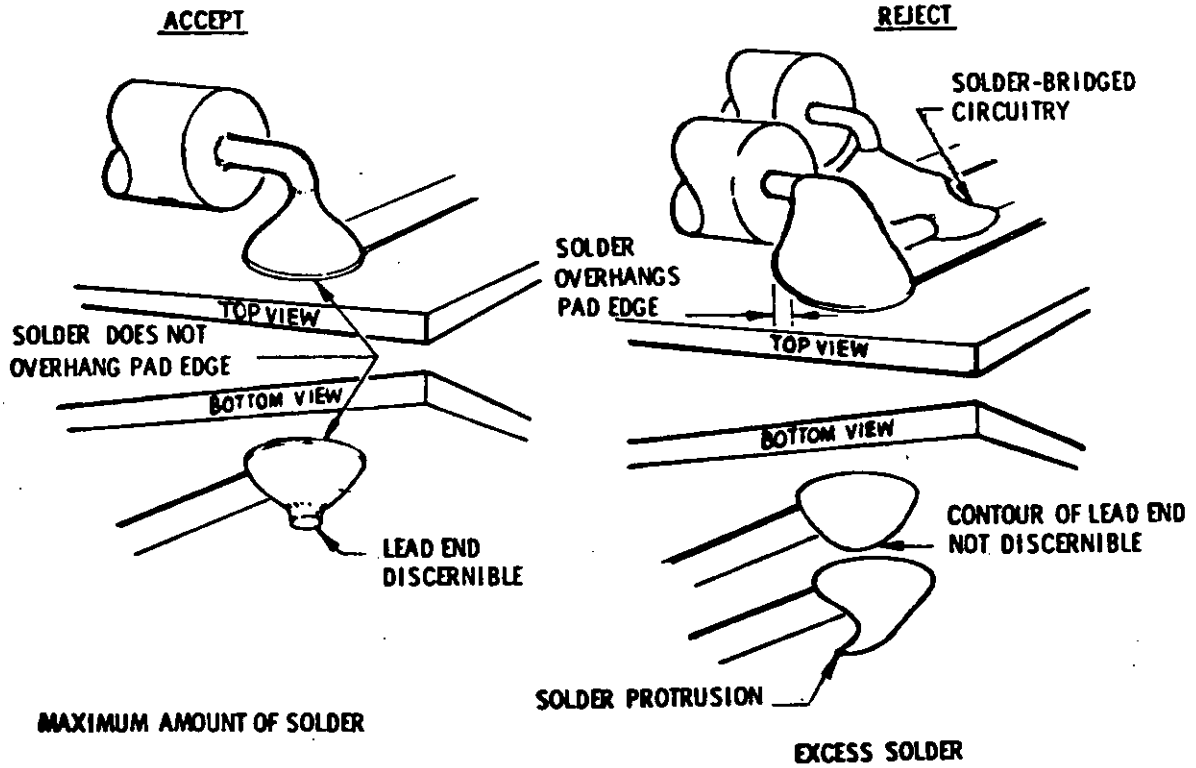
Plated-thru holes - amount of solder on joint.
